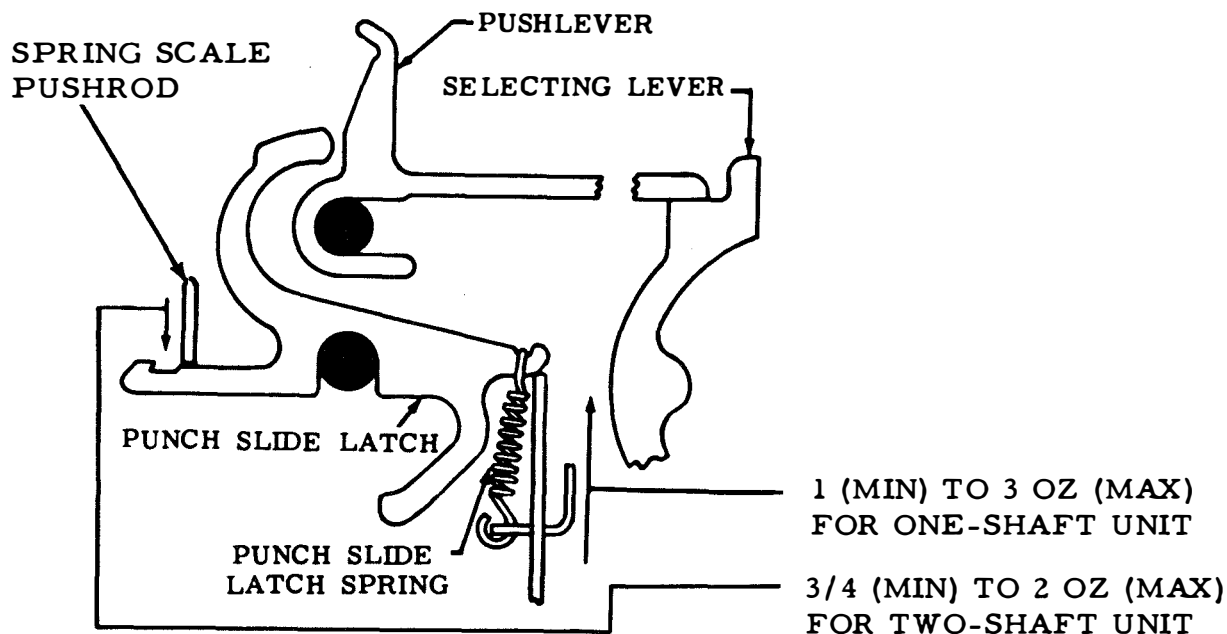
Punch Slide Latch Spring for Fully Perforated Tape
